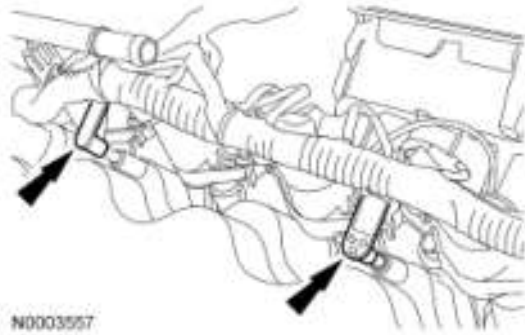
Locating Engine Wiring Harness Retainers At RH Valve Cover
